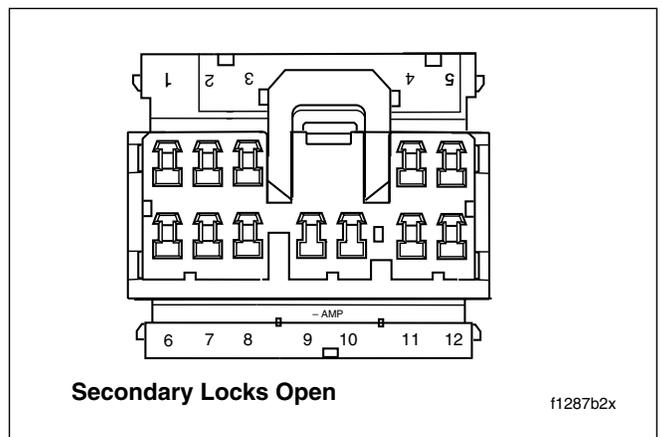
Numbers Stamped on Secondary Locks (Socket Housing Shown)
